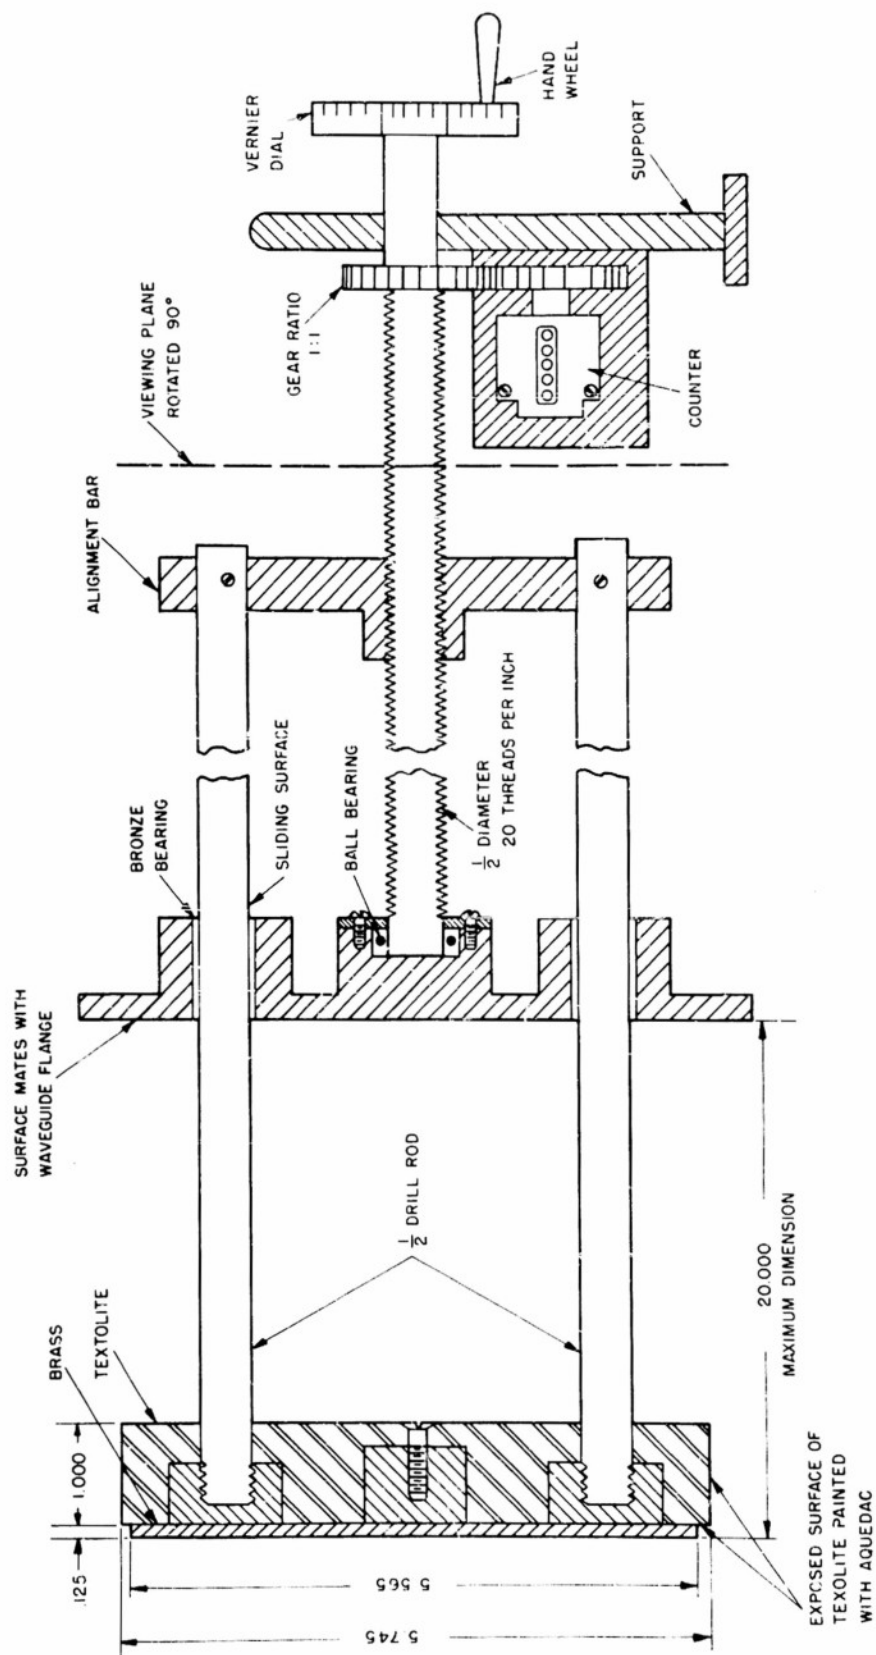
ASSEMBLY DRAWING OF SHORT-CIRCUITING PISTON
